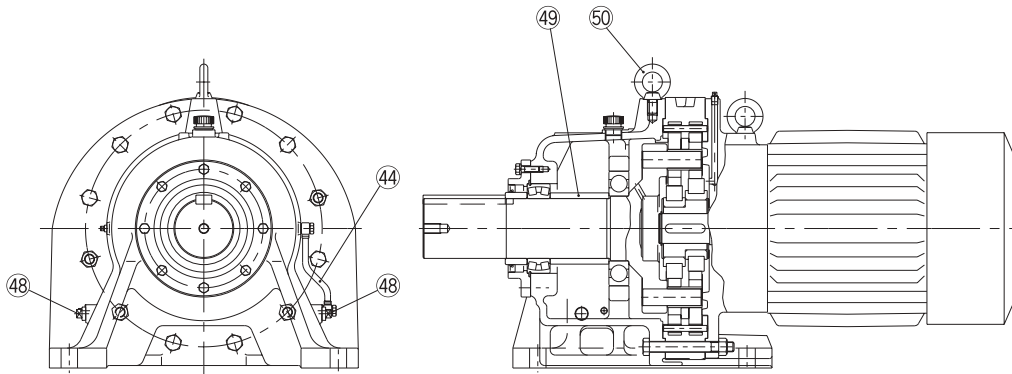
Type CHHM (Horizontal Gearmotor)
